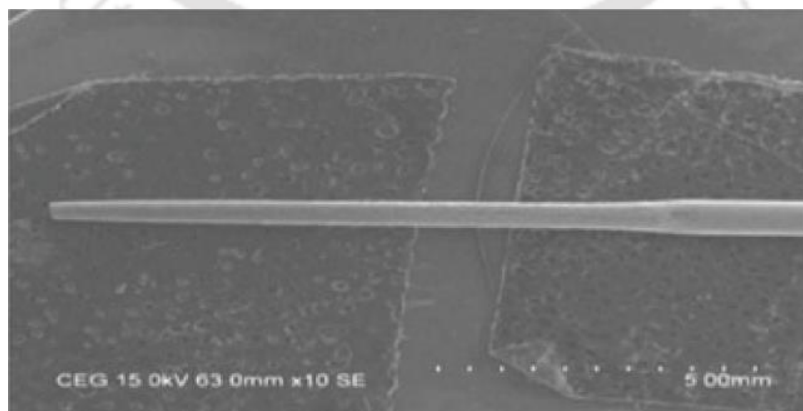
SEM image of fabricated hollow conical tool [37]
